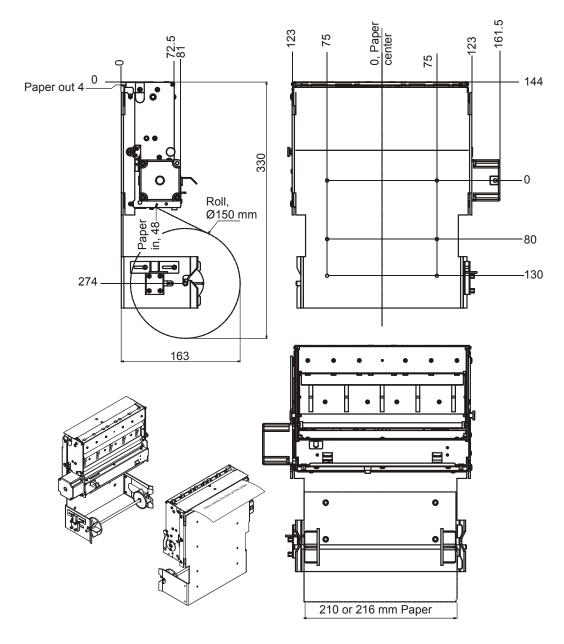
• Measurements Drawing, Vertical Printer 01760-xxx with Combo Roll Holder 01861-21x for 150 mm Roll Under Printer
